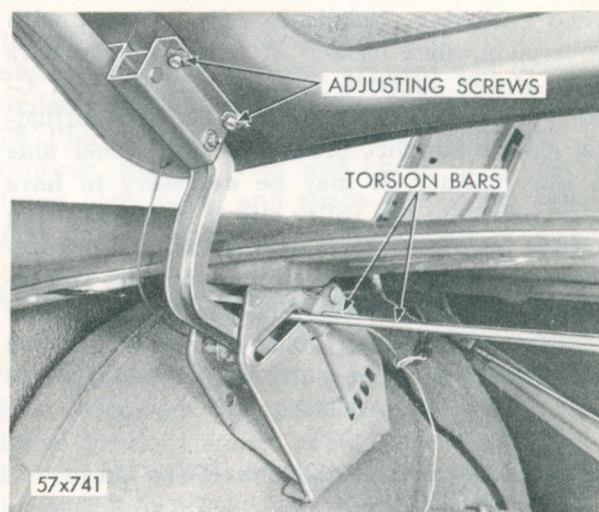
Rear Deck Hinge Assembly (Imperial)
